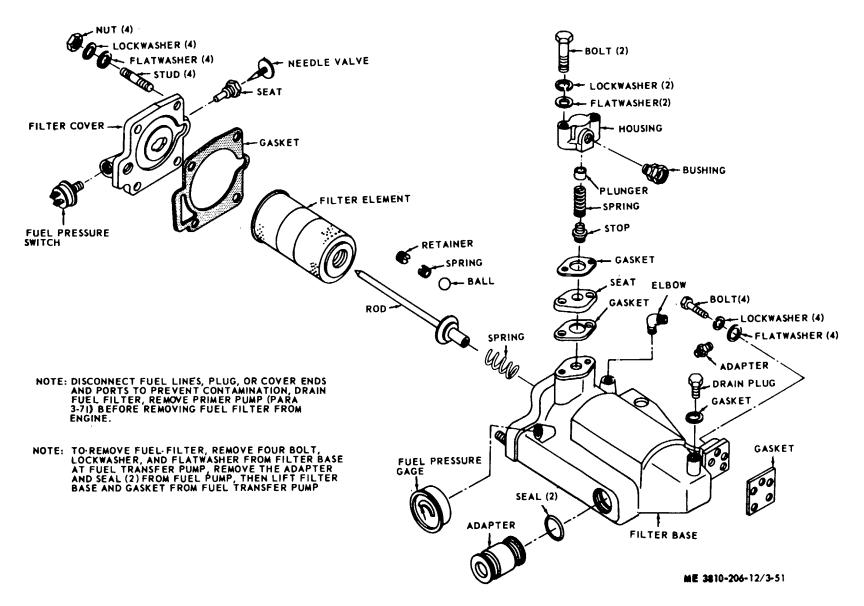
Fuel filter (for engine model D333TA), removal, disassembly, reassembly, and installation.
